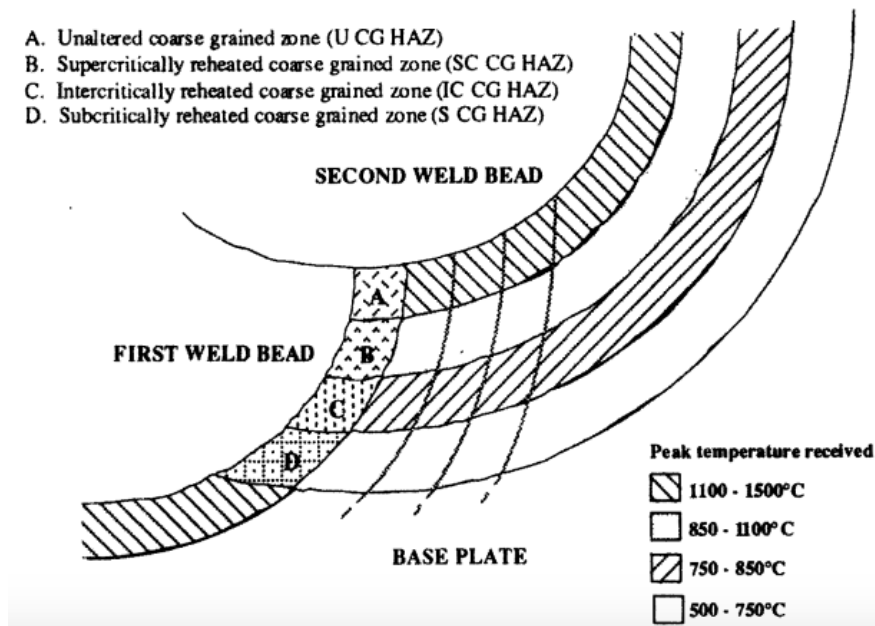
Schematic diagram of the HAZ produced during multipass welding. Adapted from [22].
